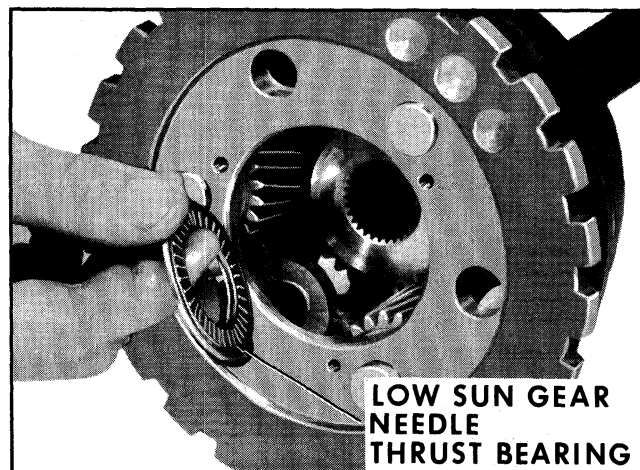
B-96 Installing Low Sun Gear Needle Thrust Bearing
